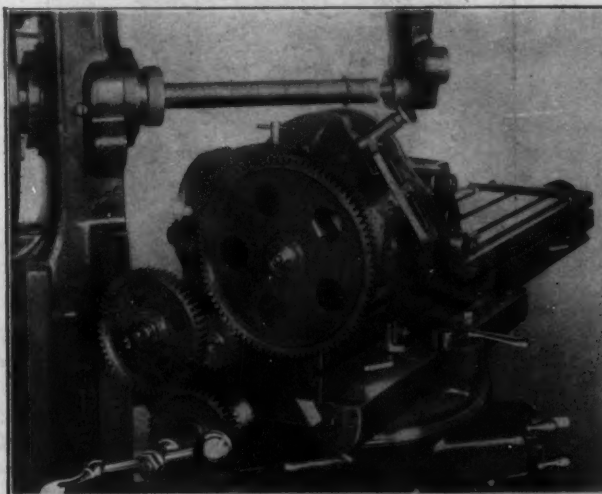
A Special Spiral Milling Job Using a High-Number Index Plate.
